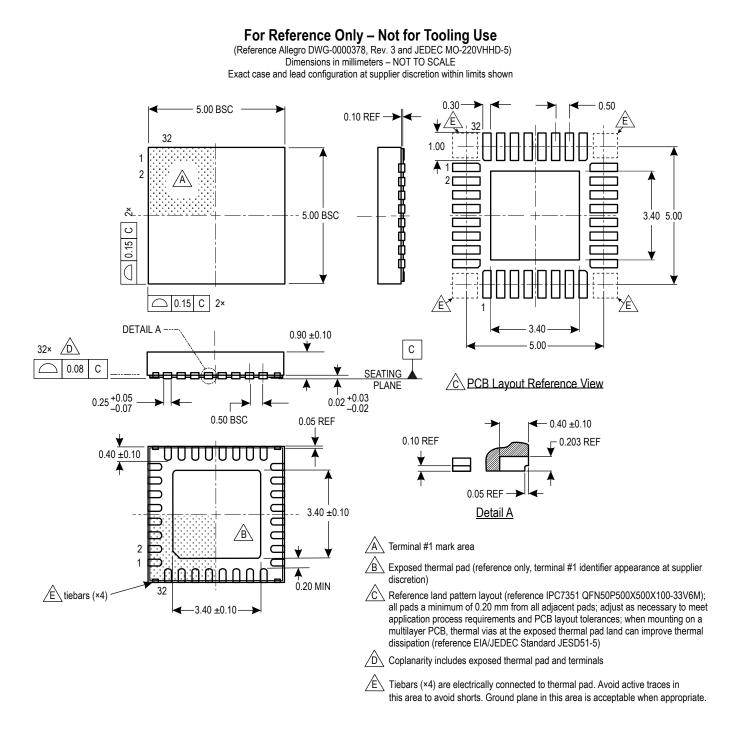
Package ET, 32-Pin QFN with Exposed Pad and Wettable Flank
